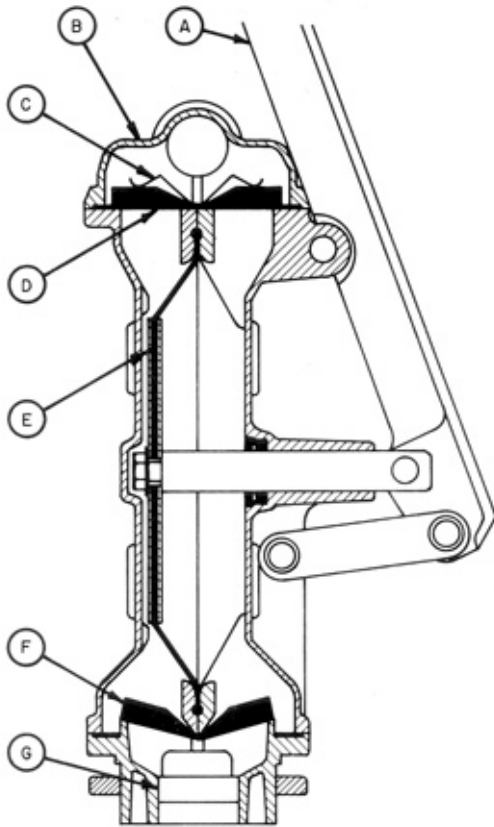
Schematic View of National 30A1 Hand Pump: (A) Pump Handle, (B) Upper Cover, (C) Valve Spring, (D) Outlet Reed Valve, (E) Diaphragm, (F) Inlet Reed Valve, (G) Bottom Cover.
